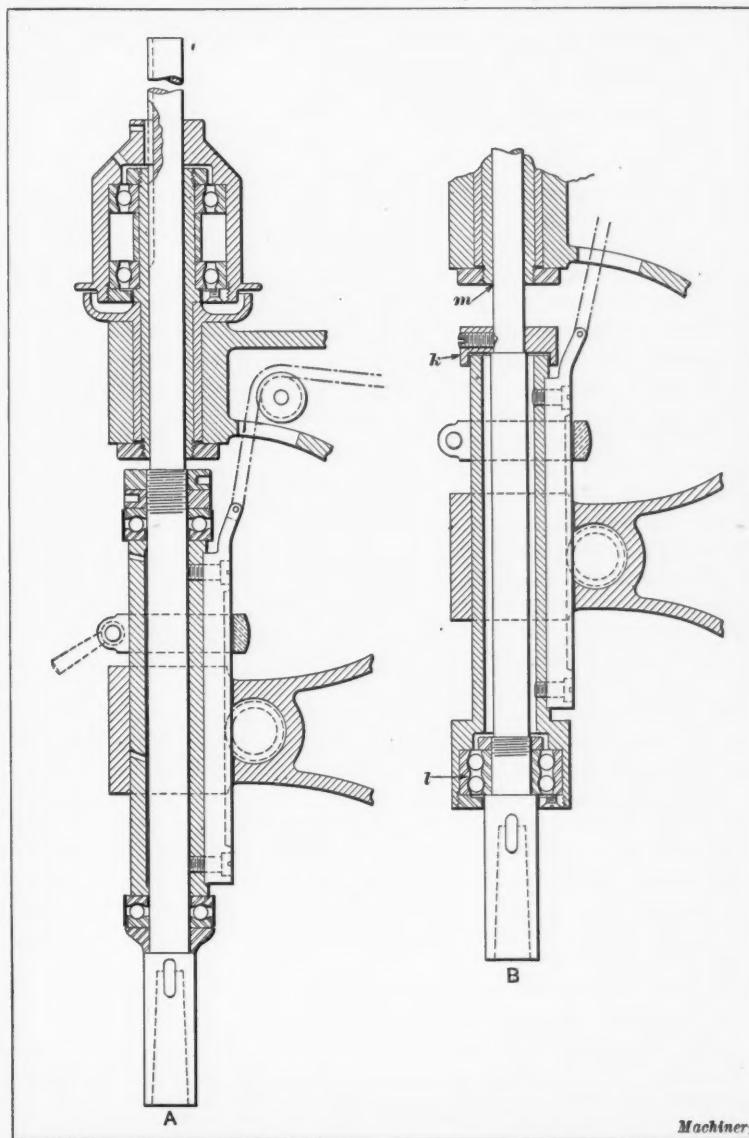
(A) Another Step in Development of High-speed Spindle Construction. (B) Design intended to eliminate Sliding Friction in Sleeve Bearing
